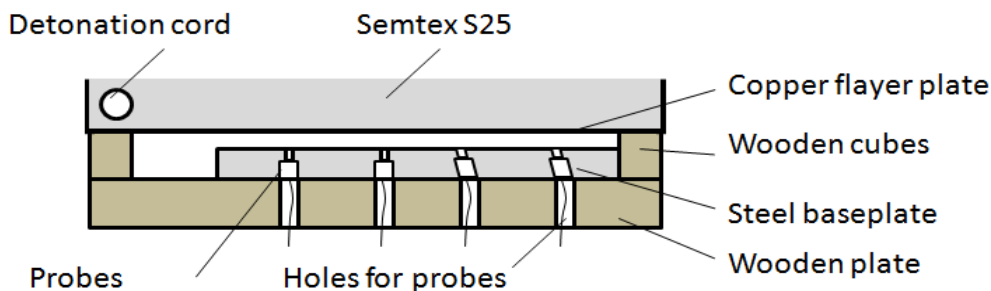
Measurement of impact velocity in the process of explosive welding.
